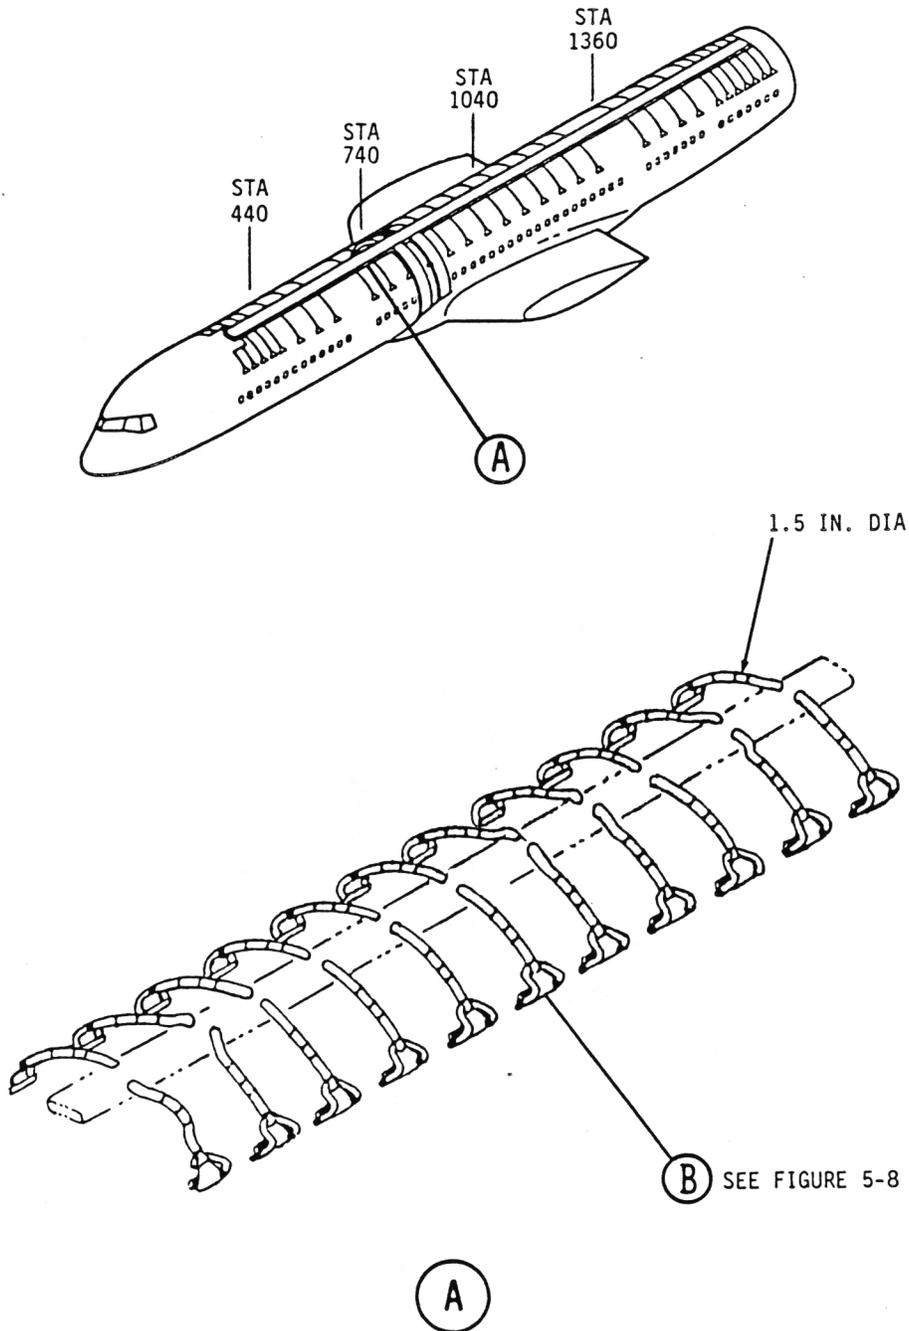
BOEING 757 SIDEWALL AIR DUCTS
